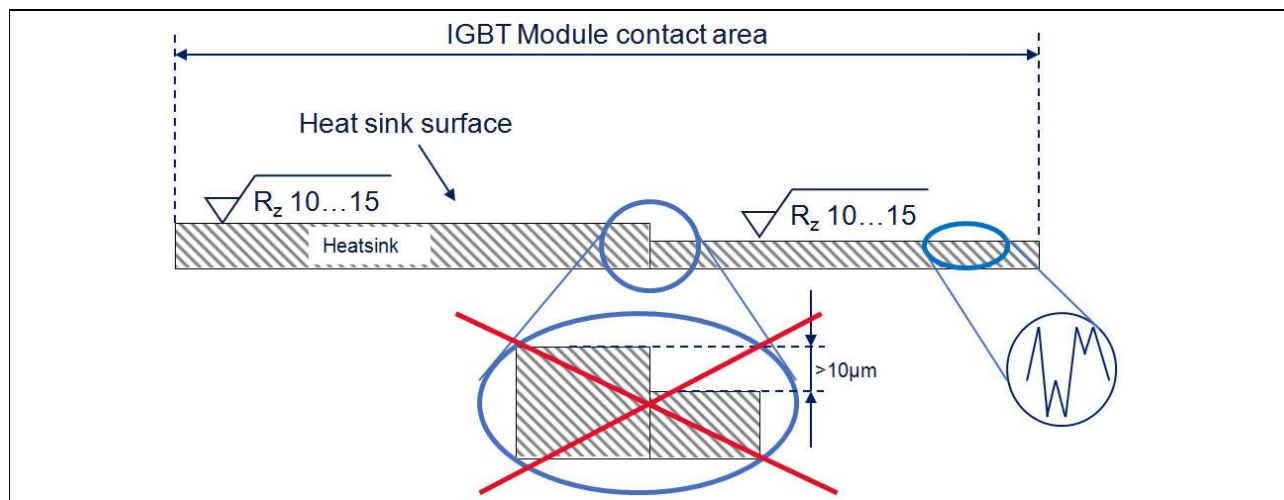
Graphic explanation of the heat sink surface roughness before module assembly
